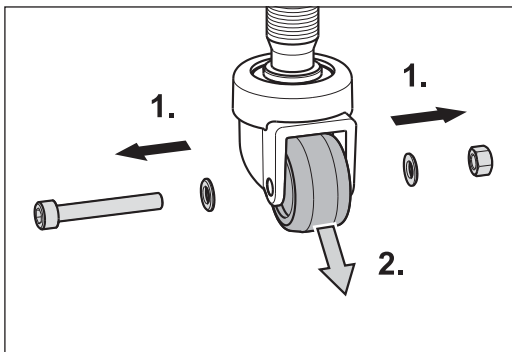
Remove the screw, washer and nut (1.) and remove the wheel from the wheel fork (2.).
